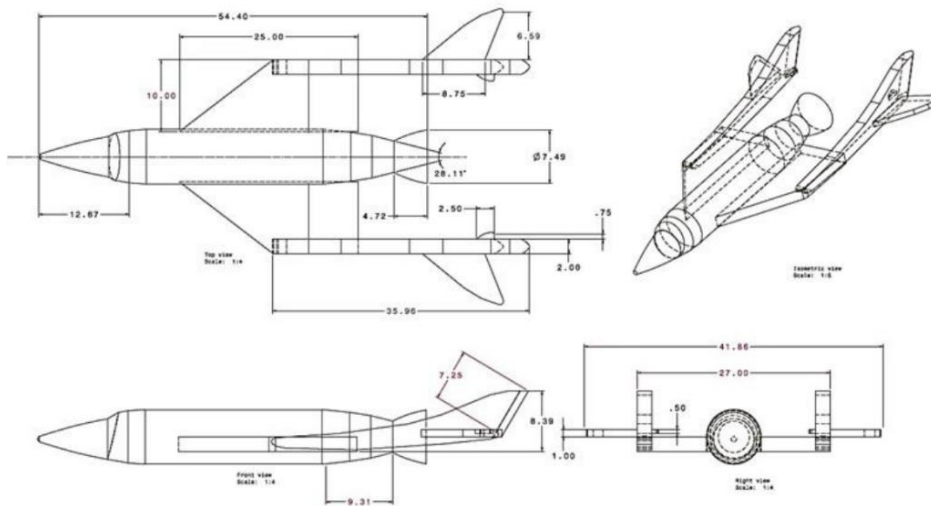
Three View Drawing of SpaceShipTwo. [credits: /16/]
